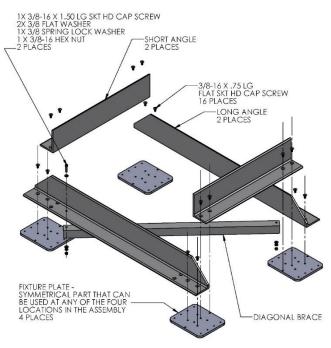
EXPLODED VIEW OF INSTALLATION FIXTURE
